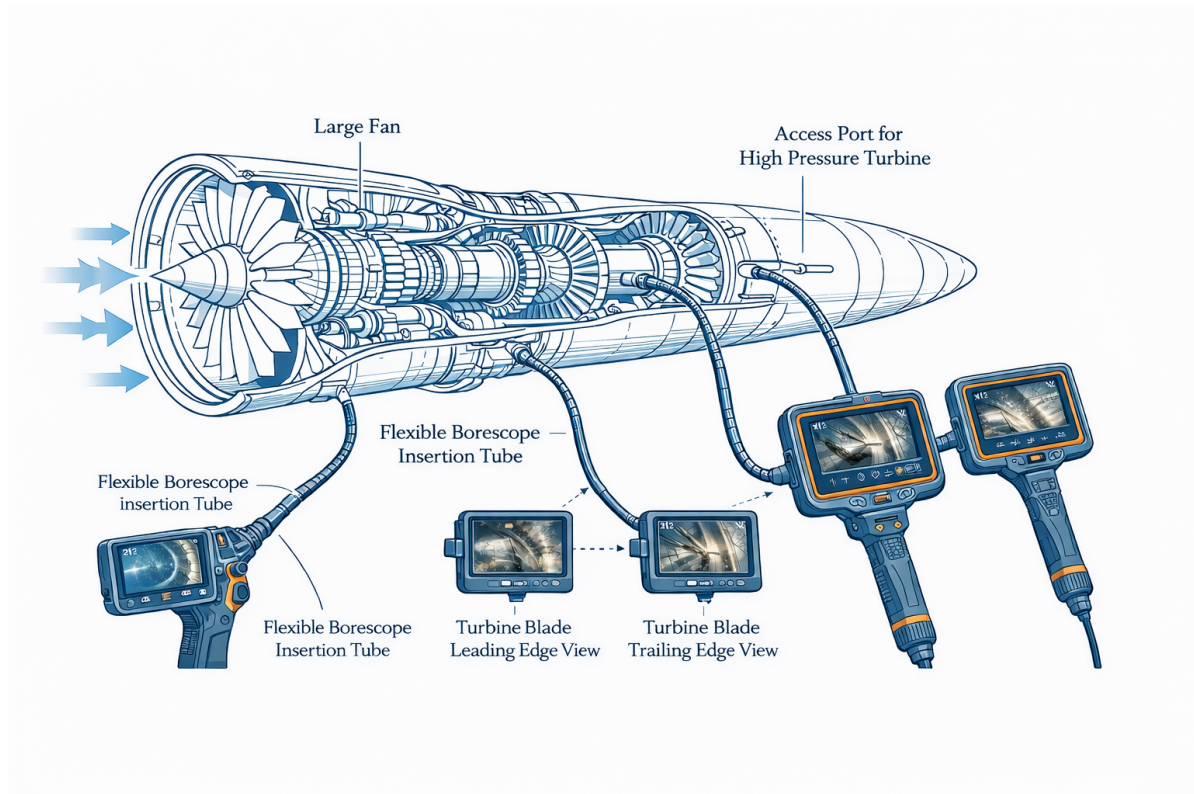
Borescope inspection setup for aircraft engine maintenance. A flexible camera is inserted through access ports to observe internal turbine components such as the high-pressure turbine.
